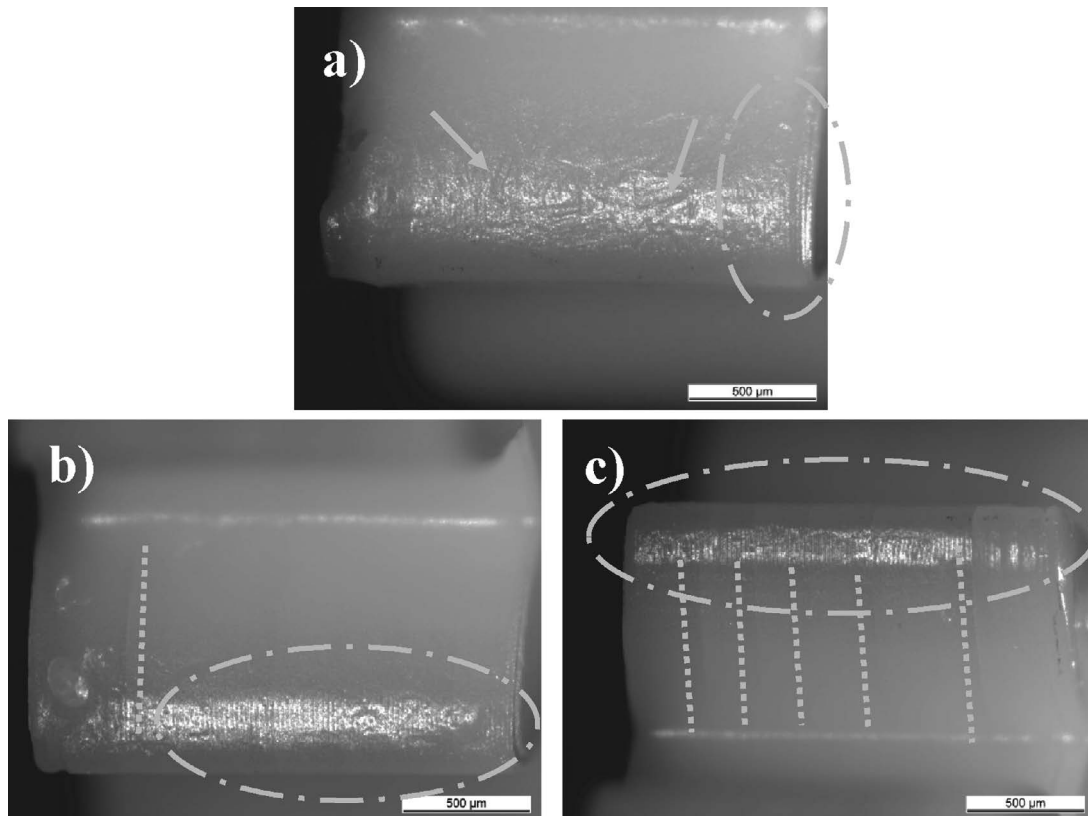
Teeth of the sintered gears printed using a) PP-4; b) PP-5; c) PP-6.
